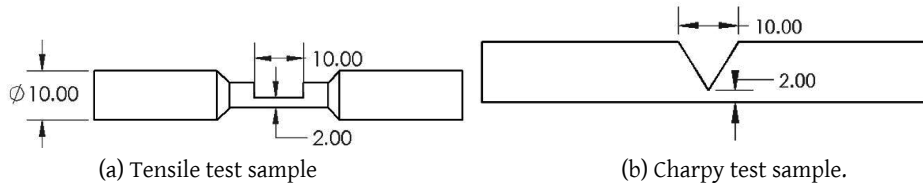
Sample cut for weld filling. All dimensions are in mm.
